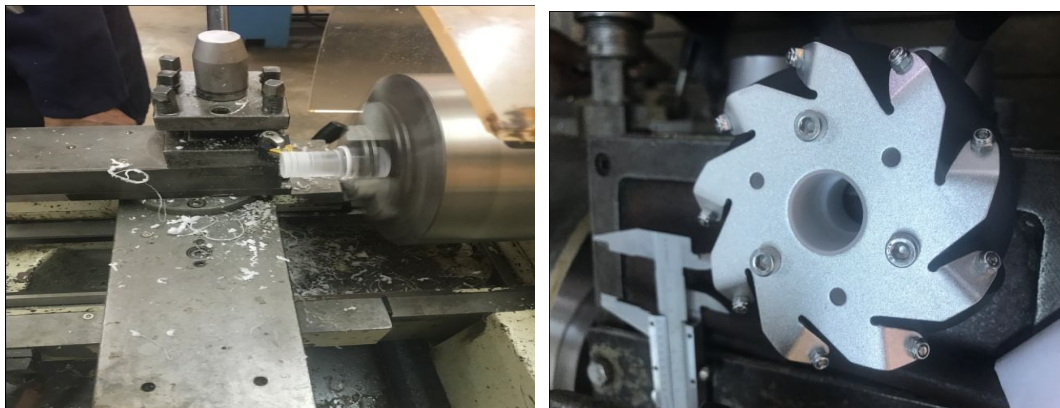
Construction of the Mecanum Wheel Shaft and the Mecanum Wheel
